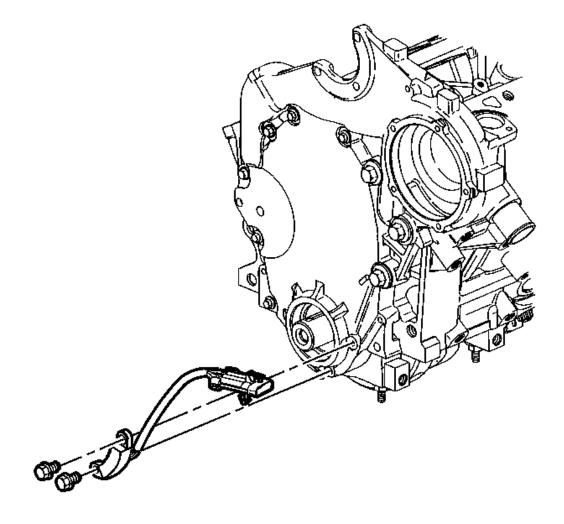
Installing Crankshaft Position Sensor Courtesy of GENERAL MOTORS CORP.
